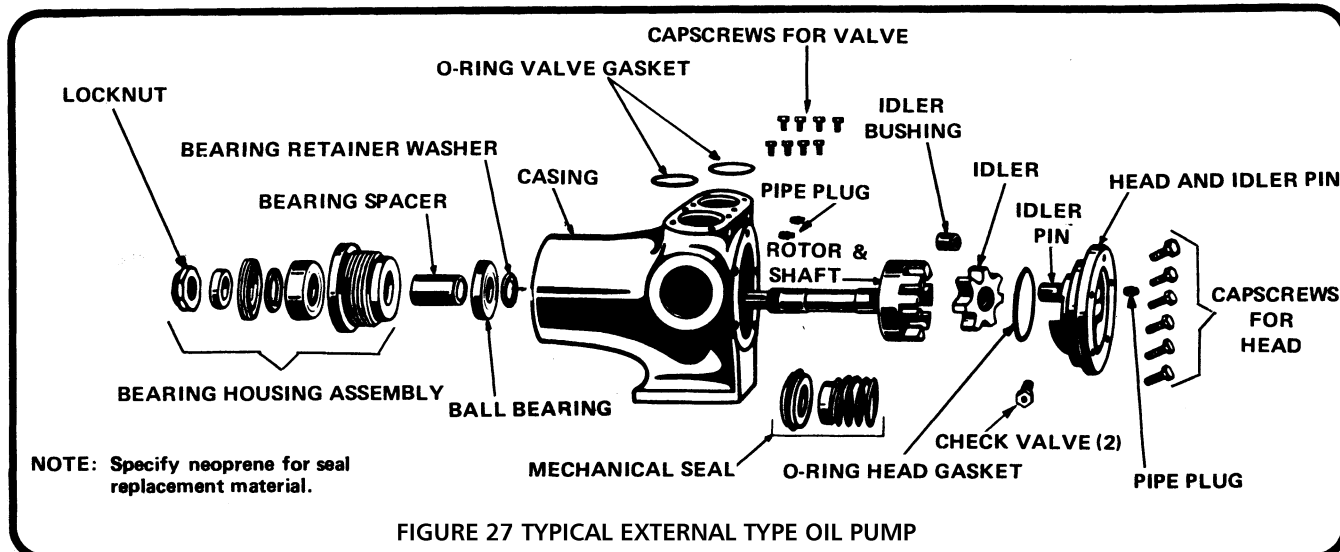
TYPICAL EXTERNAL TYPE OIL PUMP
